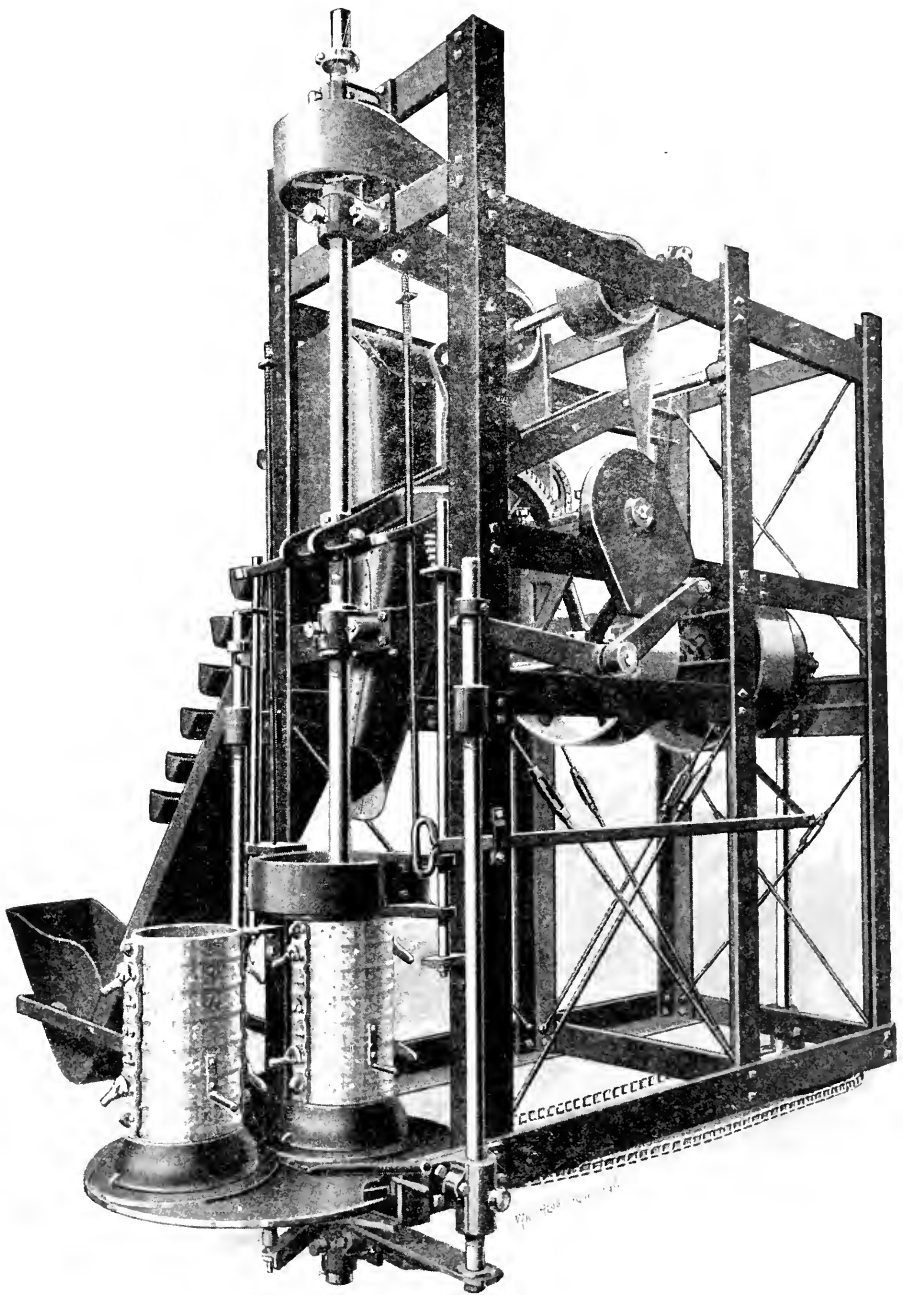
McCracken No. 3 pipe machine with equipment for bell-end sewer pipe.
